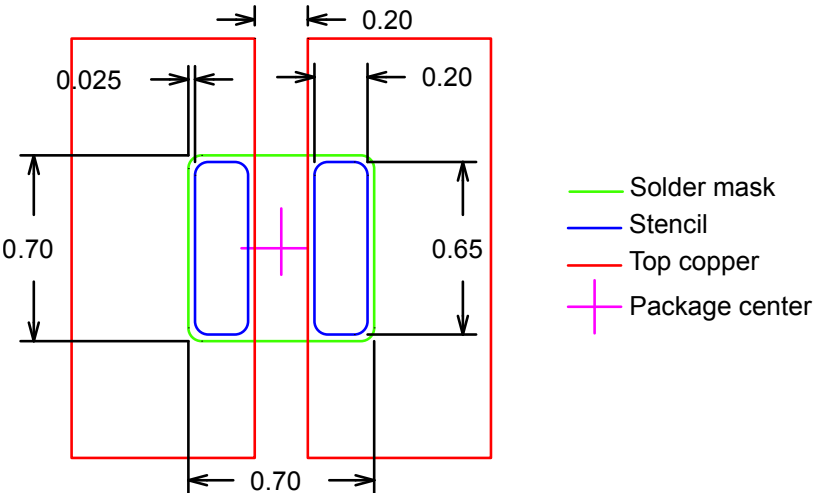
Recommended PCB solder pad layout for L0F2-Bxxx5000xxx1.
